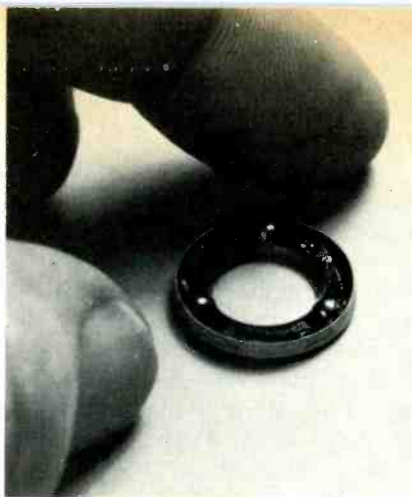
A ball-bearing assembly is used between the turntable and the mounting. These balls can bind or become hard to move, because the grease has hardened. Such defects can slow the turntable speed, or cause wow.
